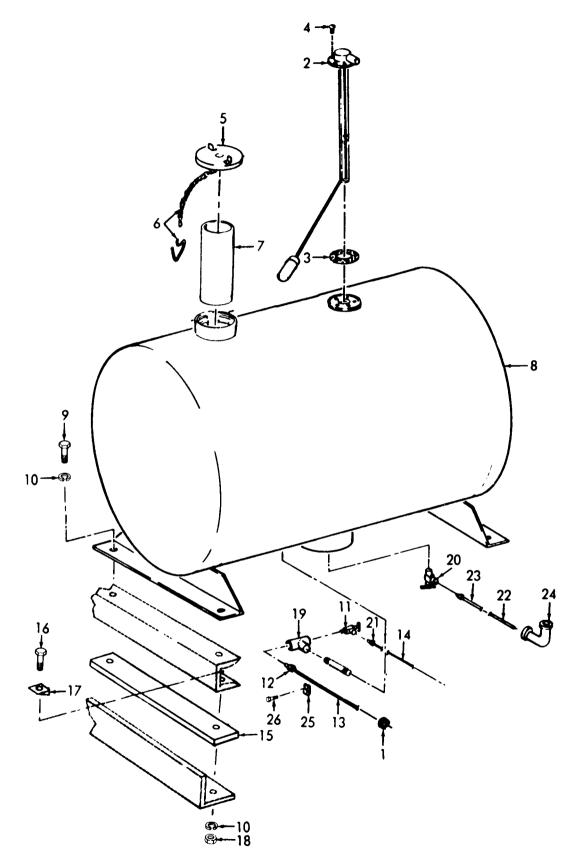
Fuel Tank, Lines, and Fittings, Removal and Installation.
